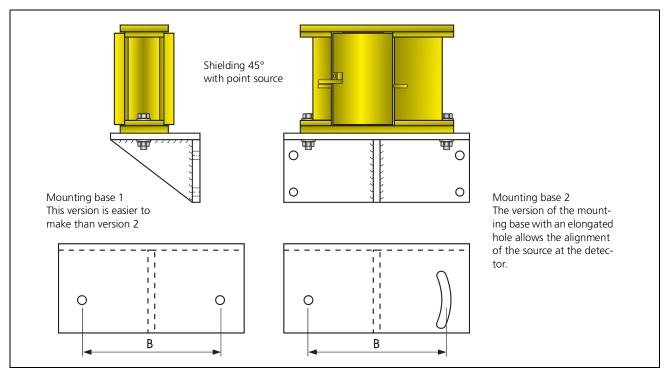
Installation proposal shielding; size B see "Technical Information" in chapter 5
